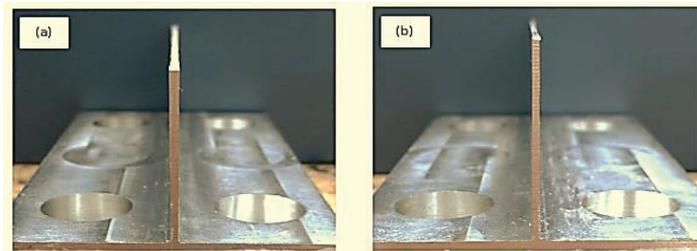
Wall thickness after machining with (a) Single cutter technique and (b) Twin cutter technique
